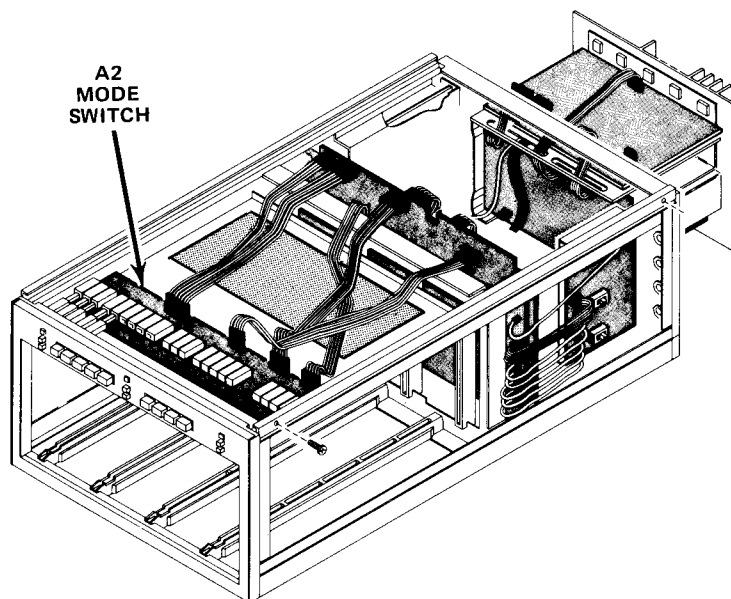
A2-Mode Switch Circuit Board Assembly.
